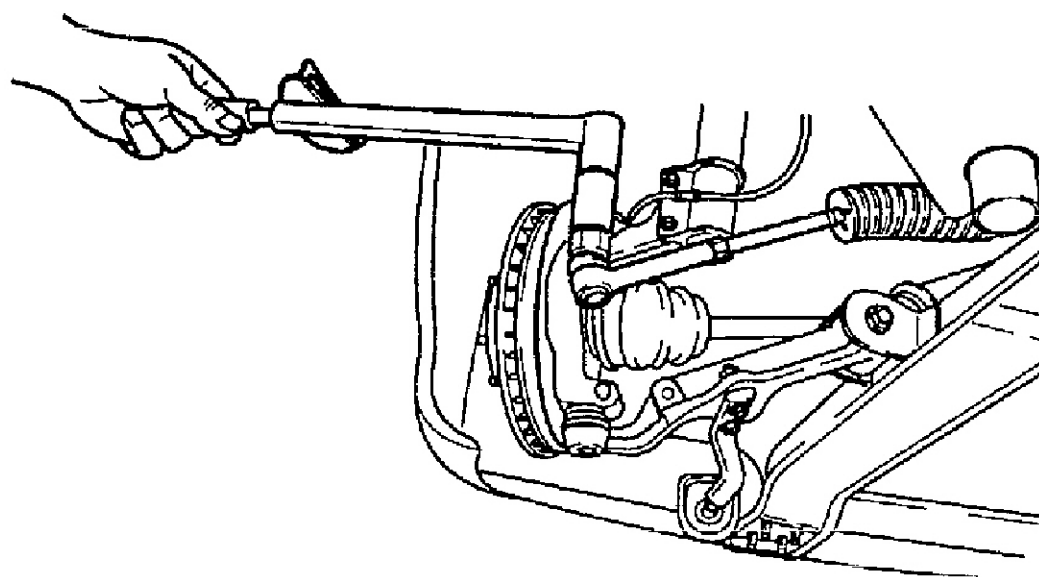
Tightening The Lower Arm Ball Joint Nut
